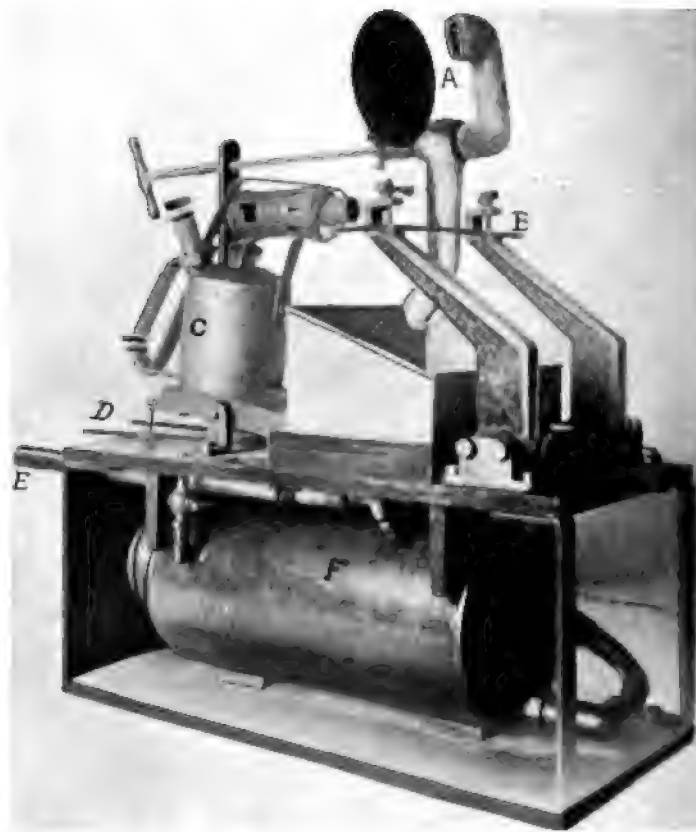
COWPER-COLES MACHINE FOR WELDING ALUMINIUM.
